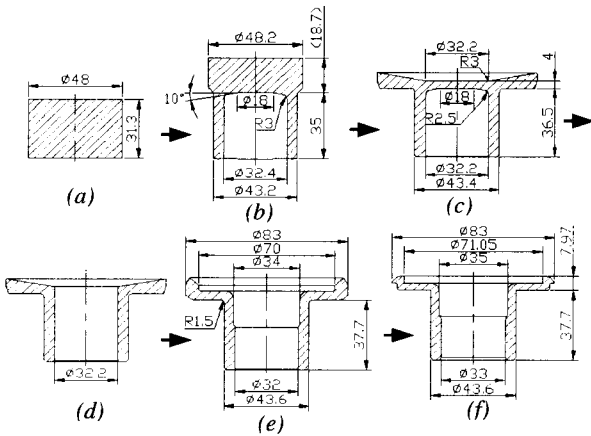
Schematic description for the forming sequence process of the impeller hub (Improvement II) : (a) Bar Cutting, (b) FWD Extrusion, (c) Upsetting, (d) Piercing, (e) Finisher, (f) Machining
